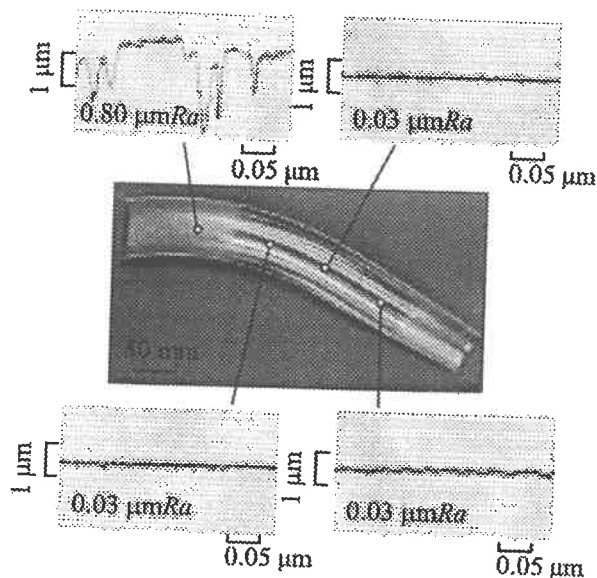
Photo of inside the SUS316 stainless steel bent tube after finishing
